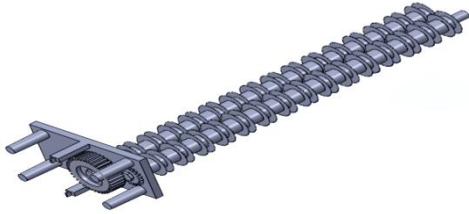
Assembled cutting blades and gears from solid work, 2015 edition.
